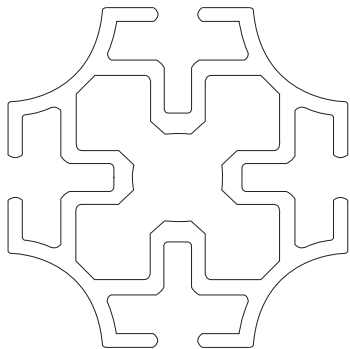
Section of the extruded aluminium E-track, 1:1
